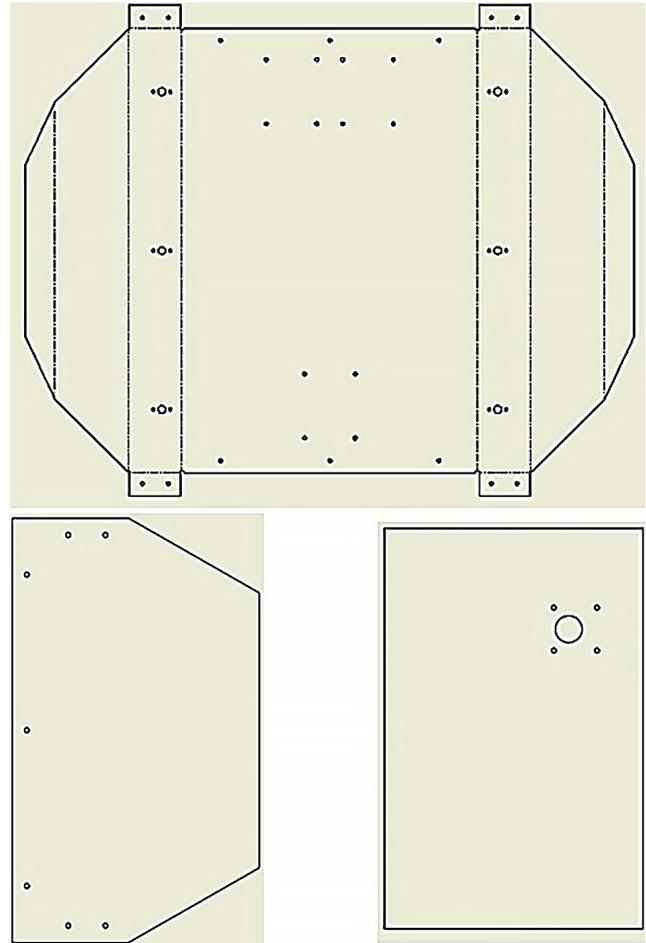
The parts of the robot vehicle frame, 1.5 mm thick aluminum plate CNC laser cutting based on 3D design
